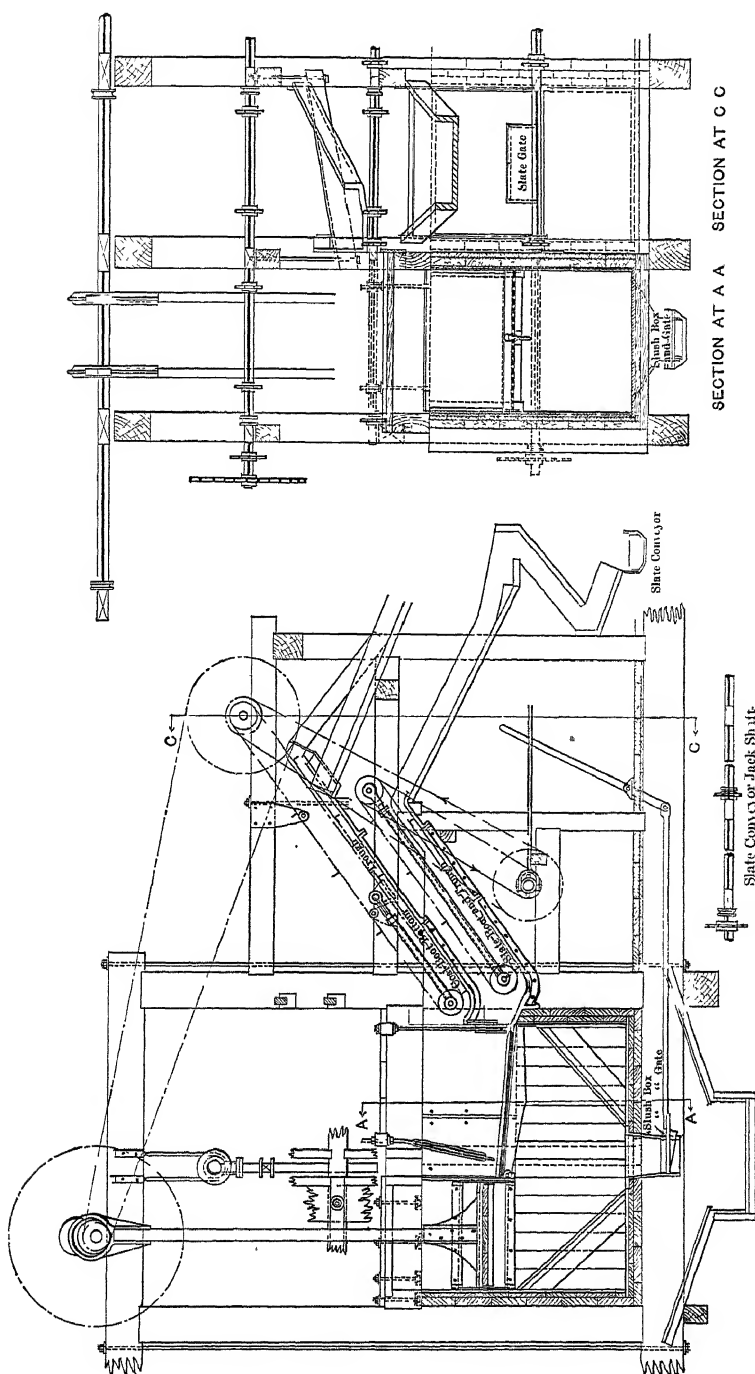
SECTION THROUGH CENTER-LINE OF JIG.
